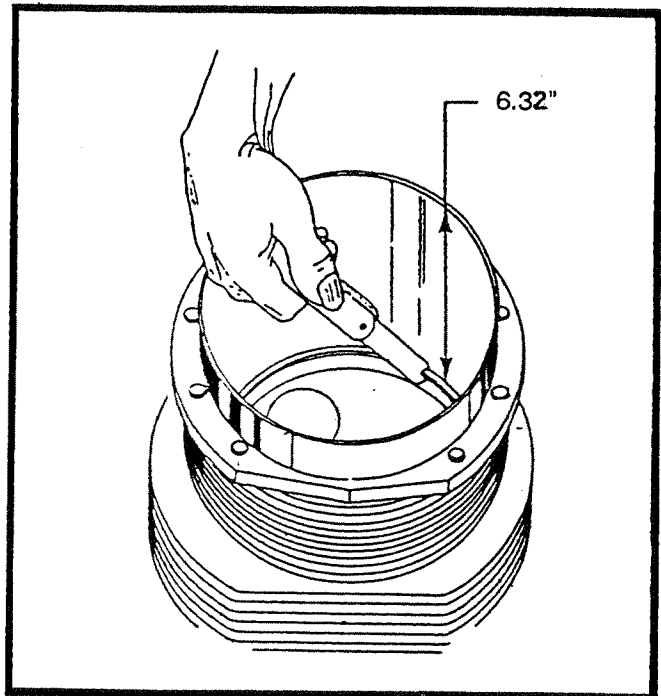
B. MEASURING RING GAP IN CYLINDER
